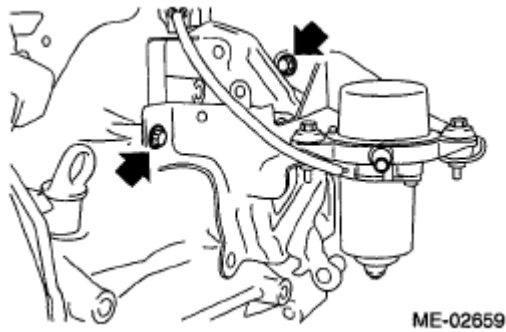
Identifying Vacuum Pump Bracket, Transmission And Bolts
